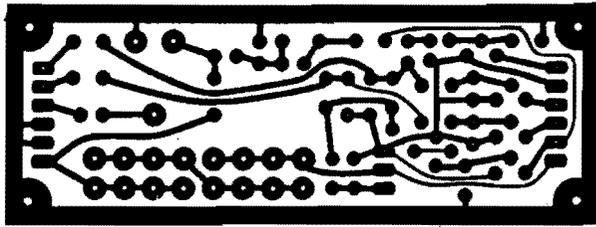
SSB/CW switching RX/TX PCB (0.8mm single-sided FR4).
